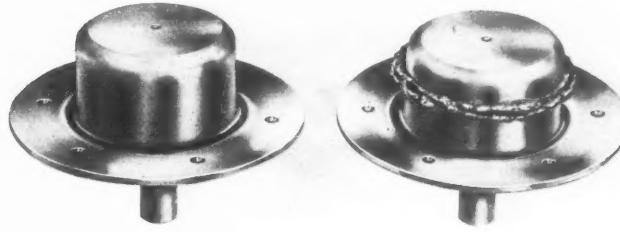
Automobile Hub Completed by Electric Welding.
